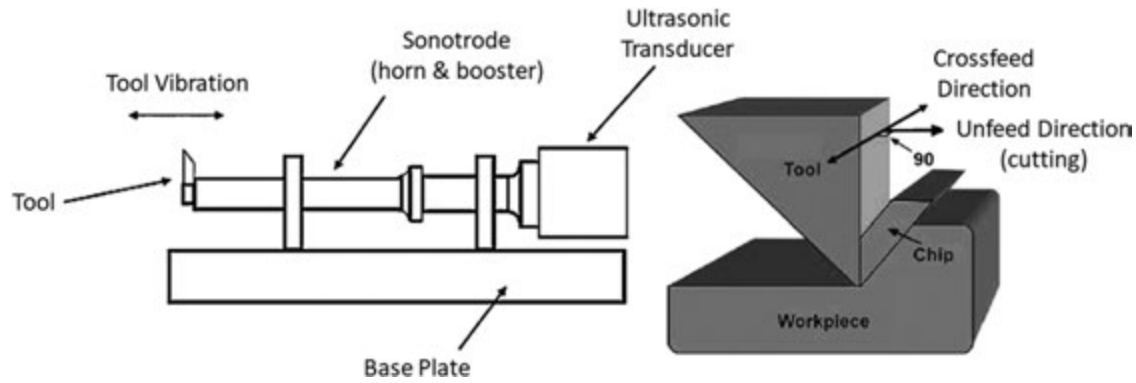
1-D vibration-assisted machining system and cutting mechanism. Reproduced from Brehl, D.E., Dow, T.A., 2008. Review of vibration-assisted machining. *Precision Engineering* 32, 153–172
